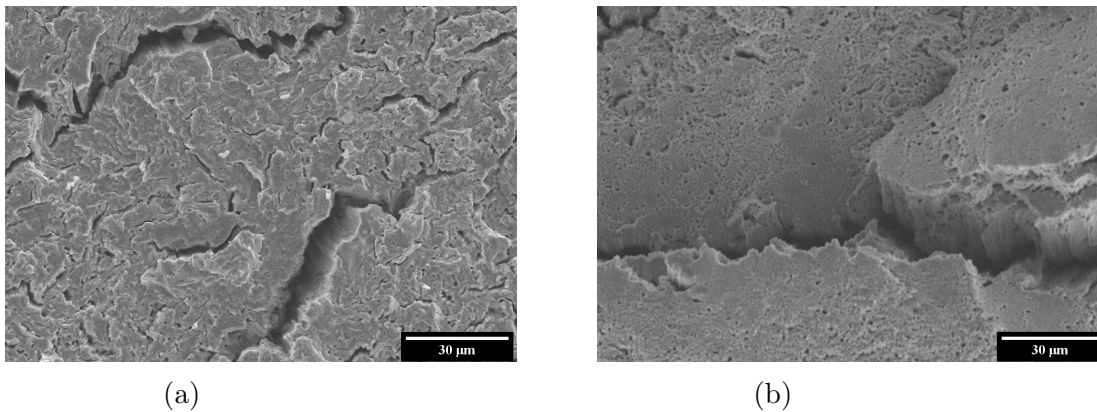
Fracture surface detail of the (a) fatigue propagation region and the (b) final ductile fracture extracted from the fracture surface of the sample tested transformed by the water-based cooling.
